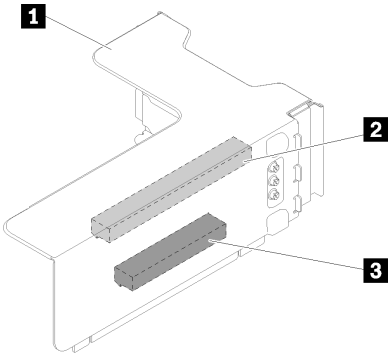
x8/x16ML2 PCIe FH Riser Assembly
